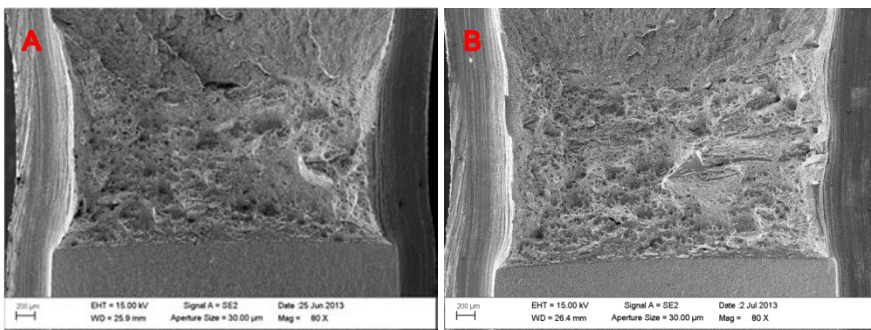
Fracture surface of the as-welded state specimen in which the crack has propagated towards the base metal.
